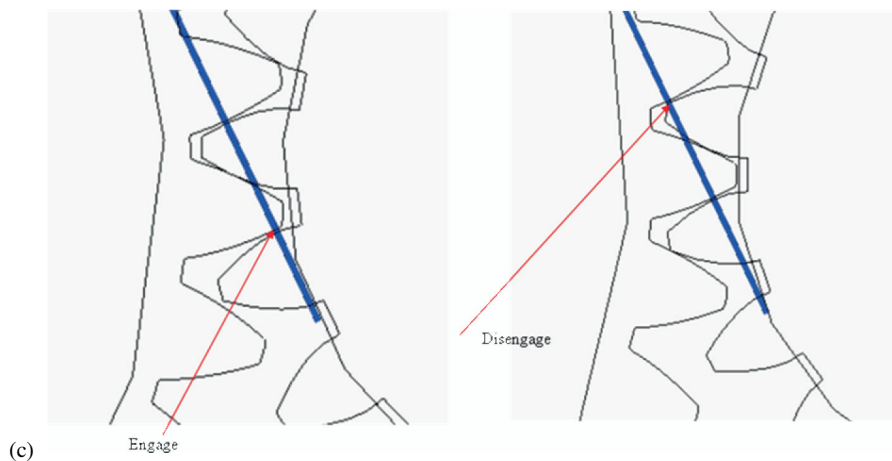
(Continued) (c) Close-up view engagement and disengagement in meshing
